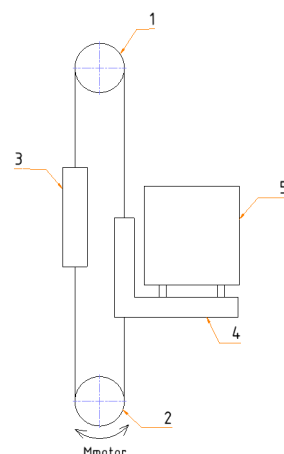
VTD working scheme: 1—upper chain sprocket (driven); 2—bottom chain sprocket (driving); 3—counterweight; 4—hoisting carriage with load handling device; 5—unit load.
